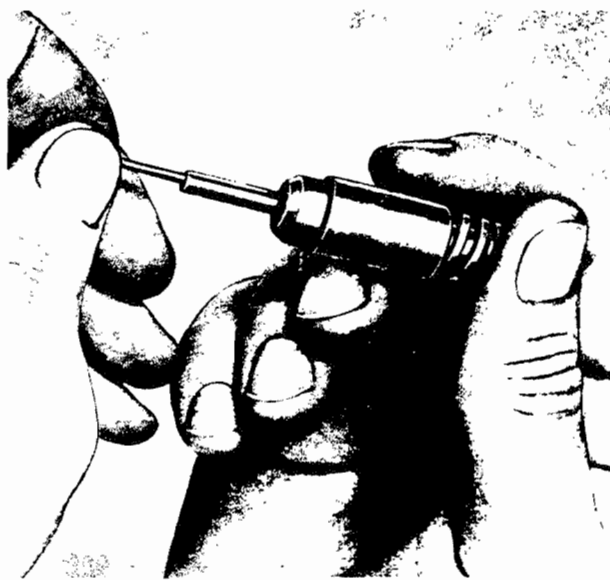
RELEASING HYDRAULIC UNIT CHECK VALVE.
